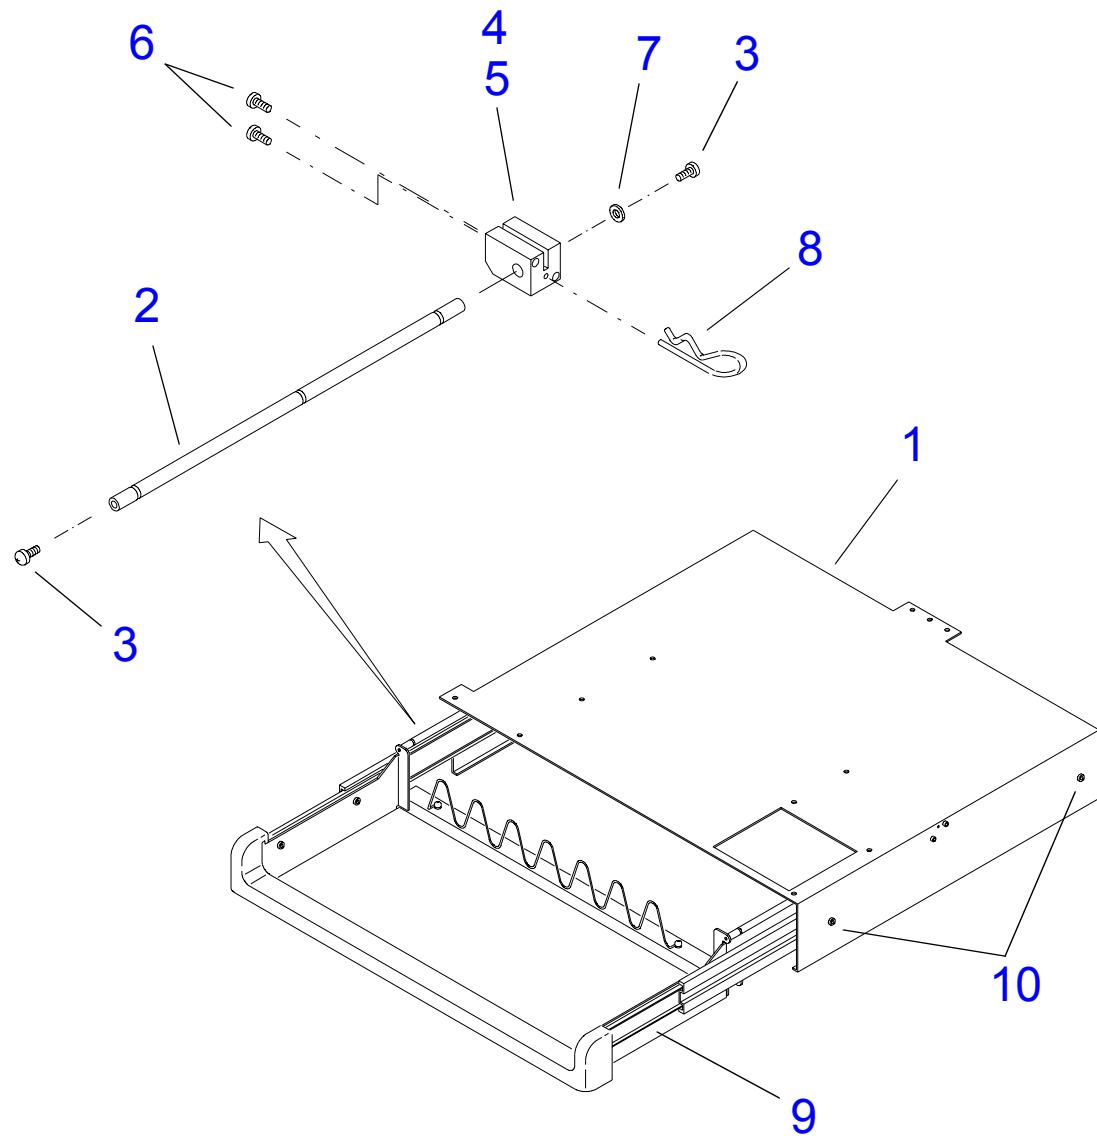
OEM Remote Tray Assembly (ISEM)
